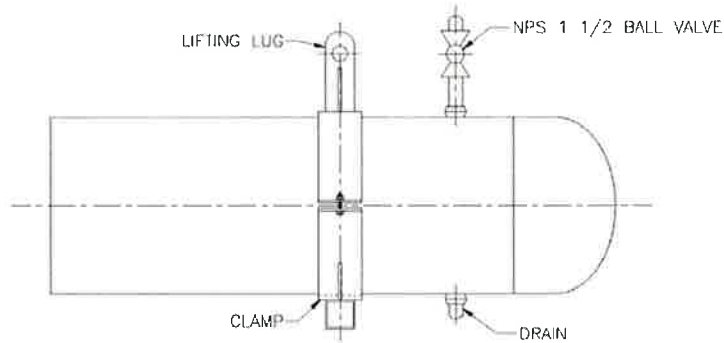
Sample Short Test Cap Layout (NPS 12 to NPS 48)
